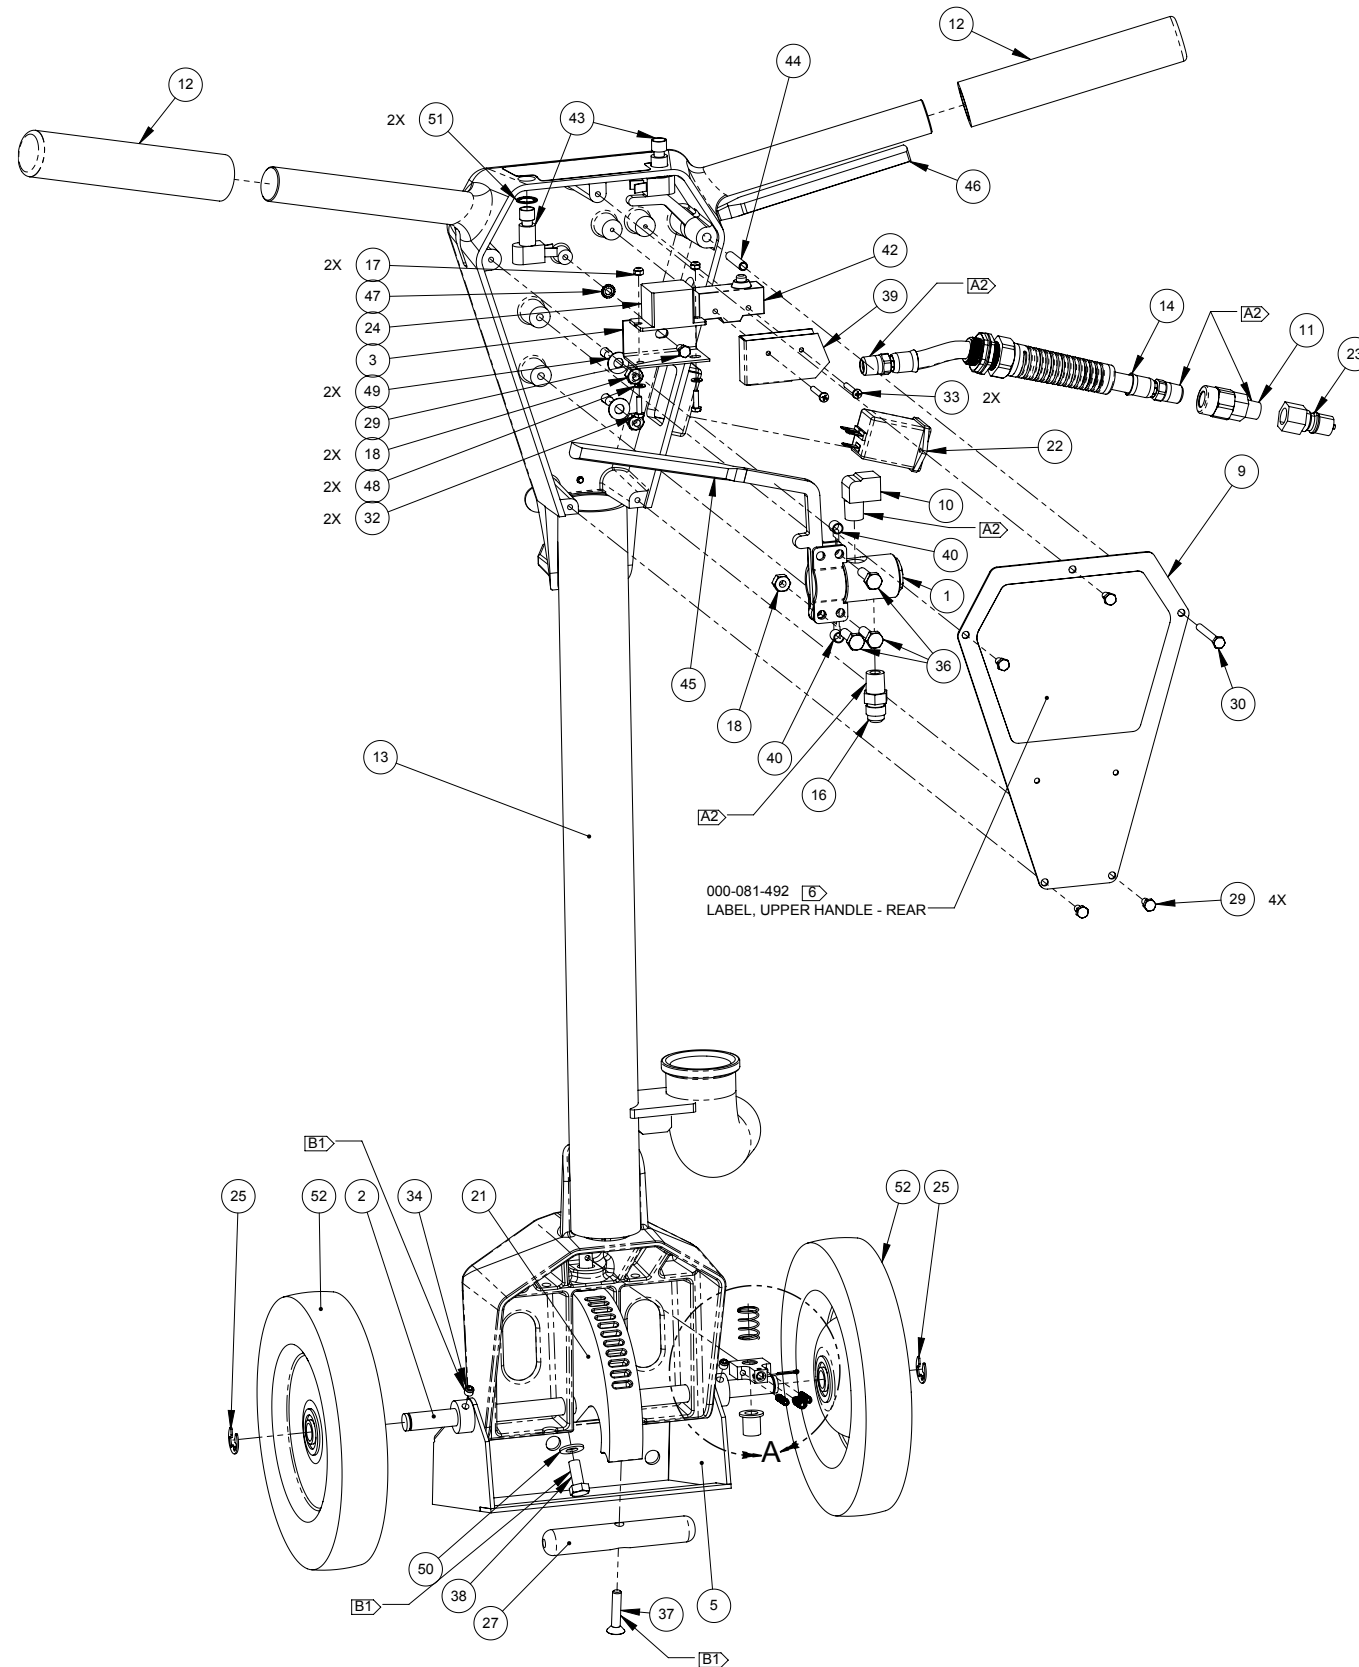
Upper and Lower Handle Assembly - View 3 of 3
